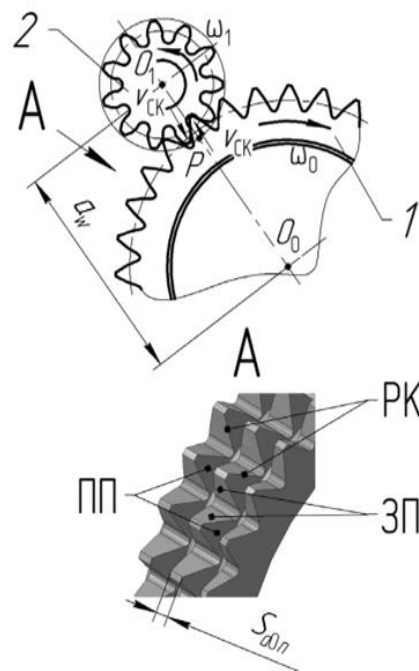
Scheme of CG gear processing by shaving and half-tone fragment of axionometry of the combined tool.
